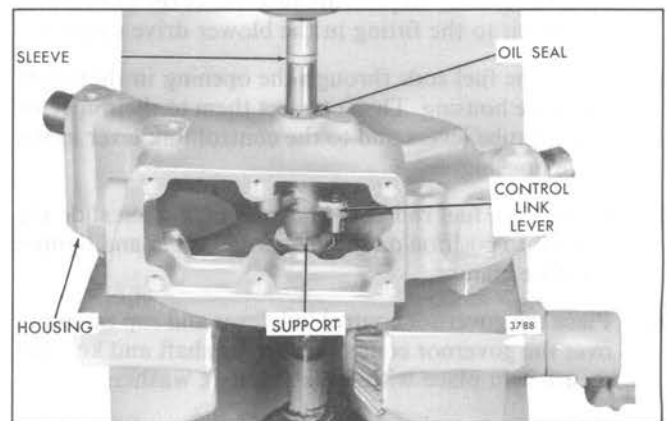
Installing Control Link Lever Shaft Oil Seal in Governor Drive
